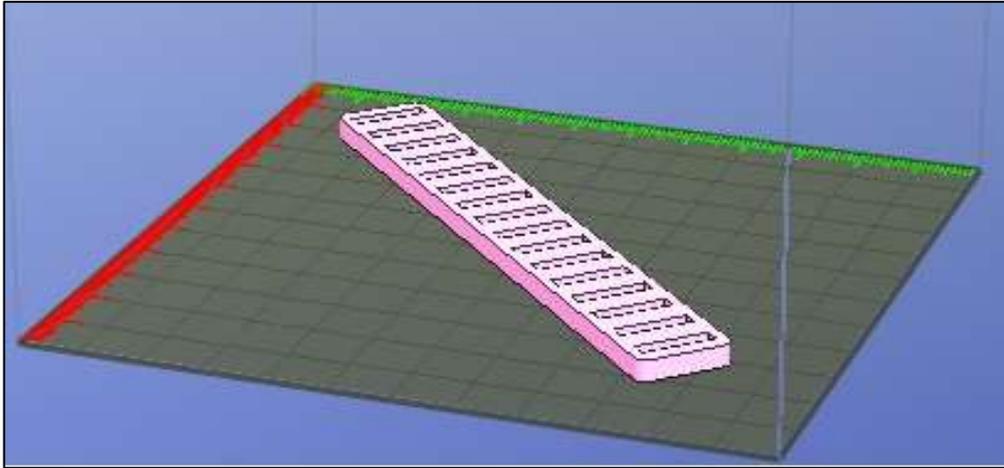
Partition of Right Hand [RH] Header of Flat Shape Microchannel
